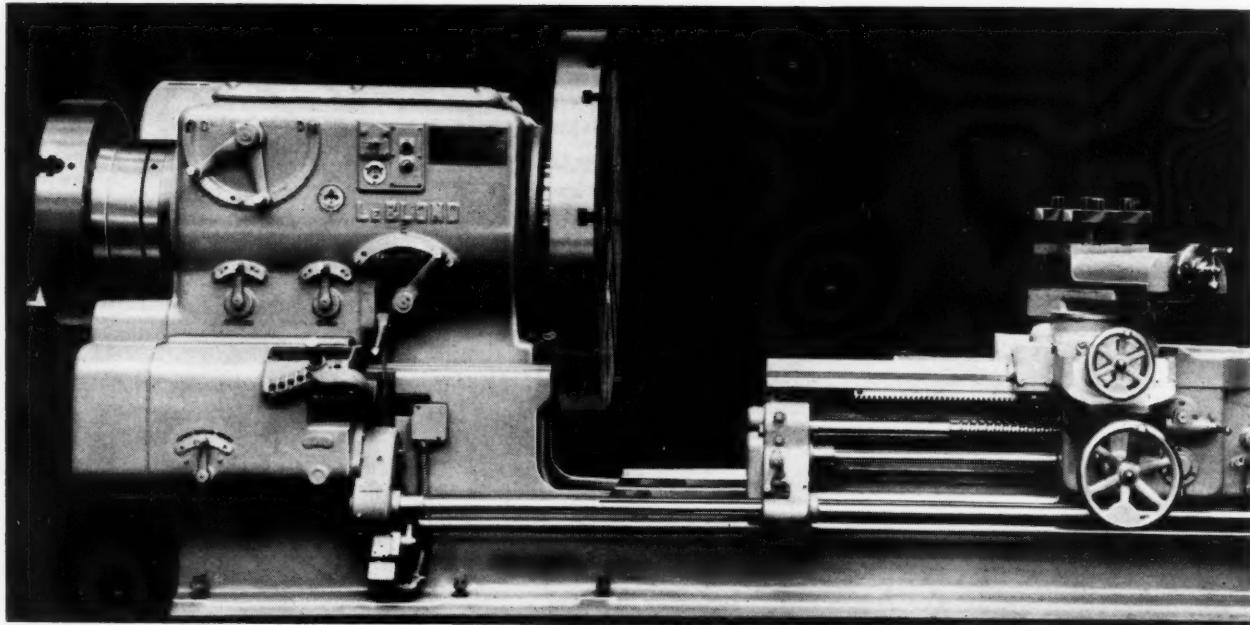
LeBlond combination sliding-bed gap, hollow-spindle lathe shown with upper bed extended to provide gap for handling large-diameter work
